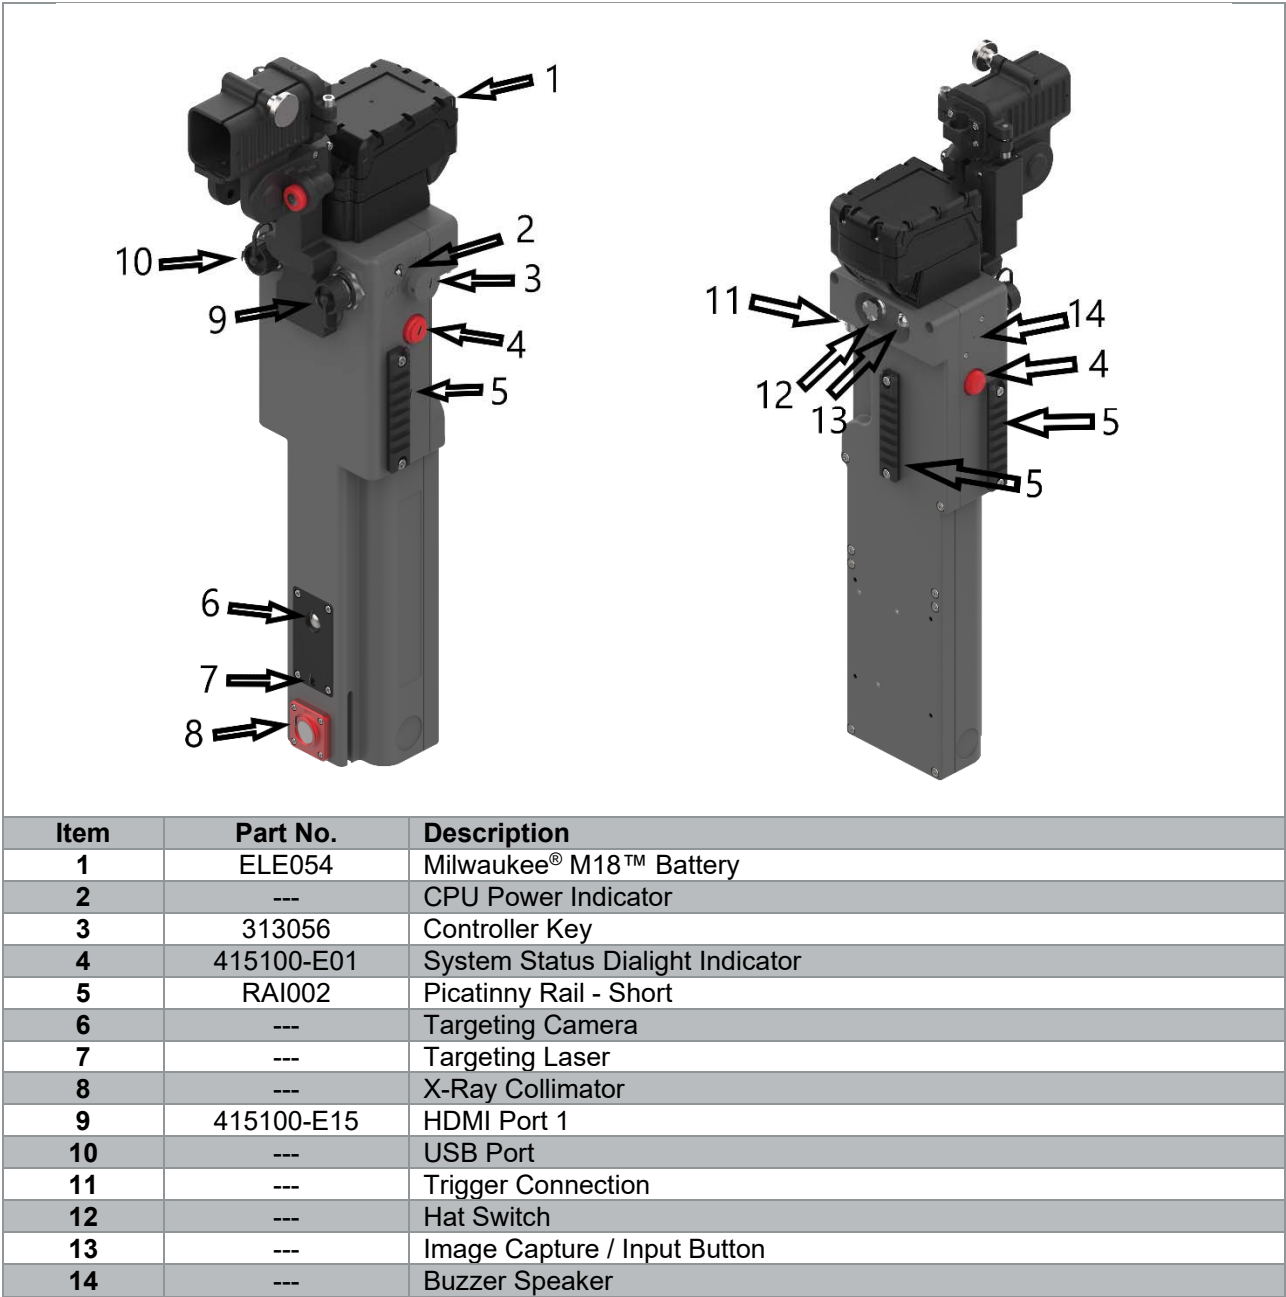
OpenVision HD Main Housing Assembly (Item # 415100-NDT)
